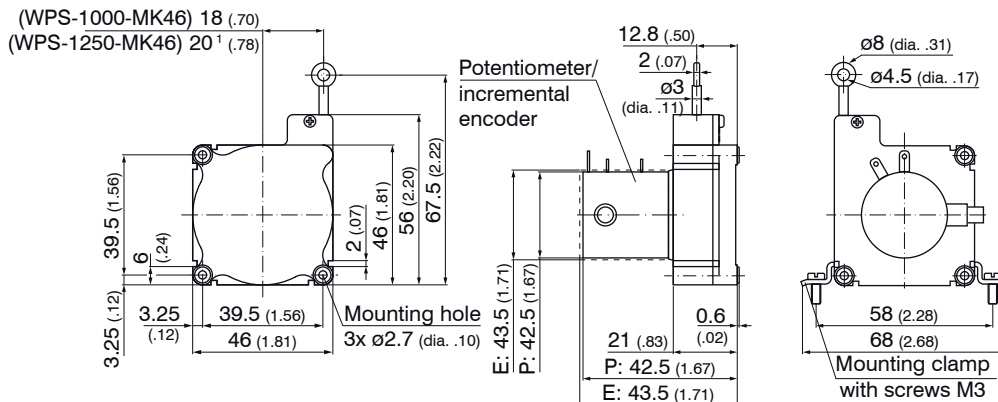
Dimensional drawing WPS- ... -MK46, with potentiometer or encoder, dimensions in mm (inches), not to scale
